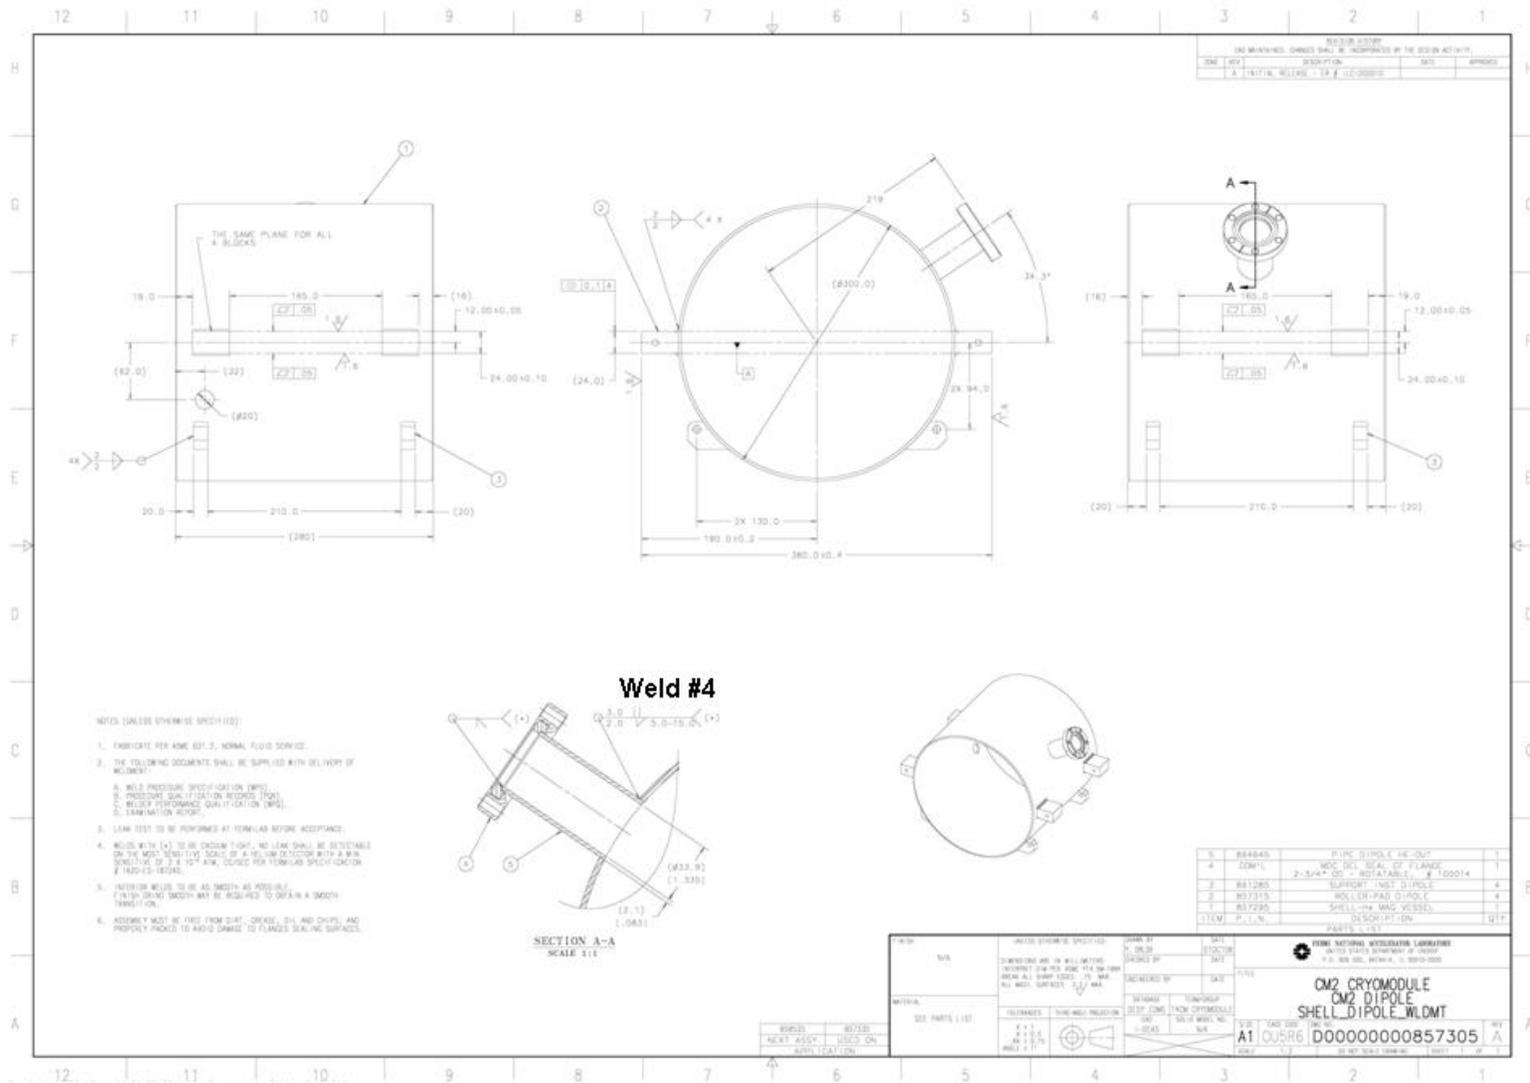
CM2 Shell dipole weldment (Drawing 857305)
